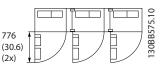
Space in front of IP21/IP54 enclosure type, frame size F11
